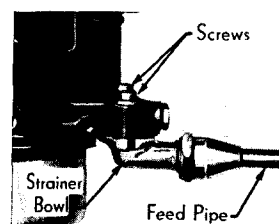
The strainer in the carburetor bowl may be removed by disconnecting the feed pipe and removing the two screws.
